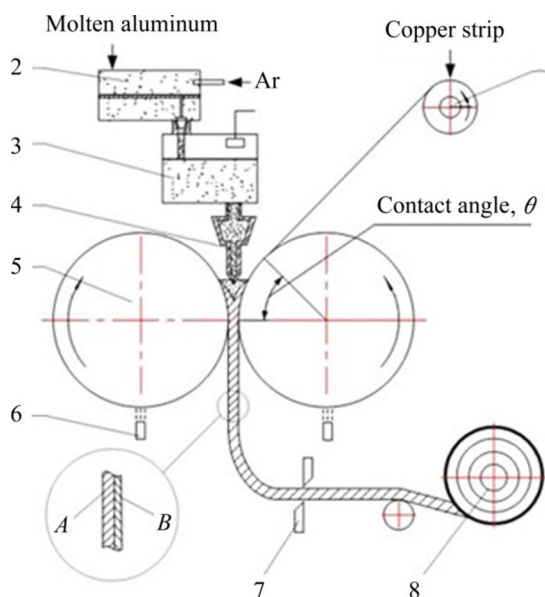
Schematic diagram for SLCRB of Cu/Al clad strip: 1—Decoiler; 2—Ladle; 3—Tundish; 4—Delivery device; 5—Twin-roll caster; 6—Spray system; 7—Shearing machine; 8—Coiler
